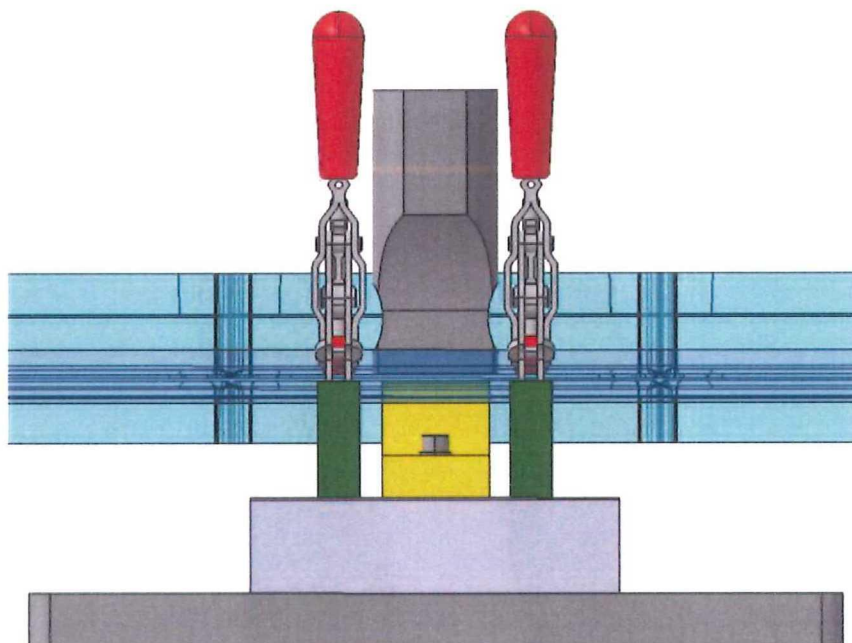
Front-view of the Z51430 fixture to weld the fuselage frame to the orthogrid panel.
